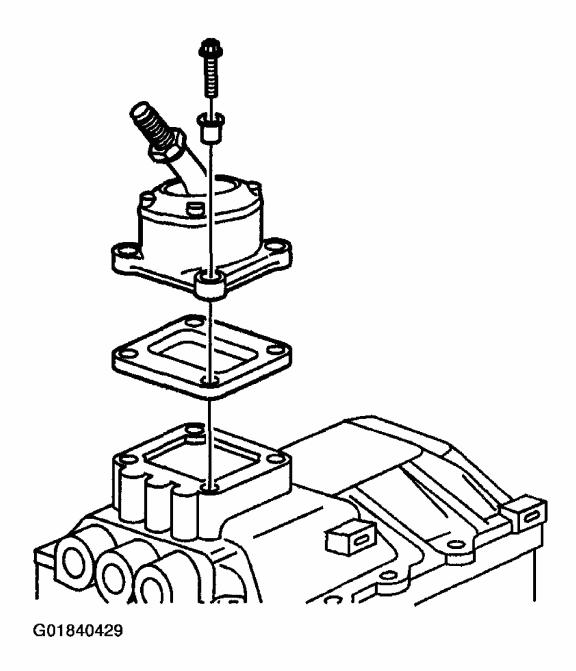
Removing Bolts Securing Shift Housing To Transmission
